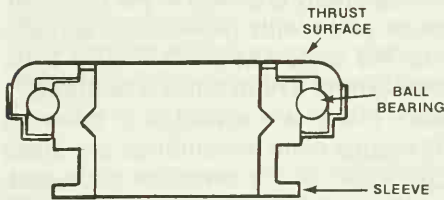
The release bearing contains ball bearings between a sleeve and a thrust surface. (Chevrolet Motor Division of General Motors Corporation)
